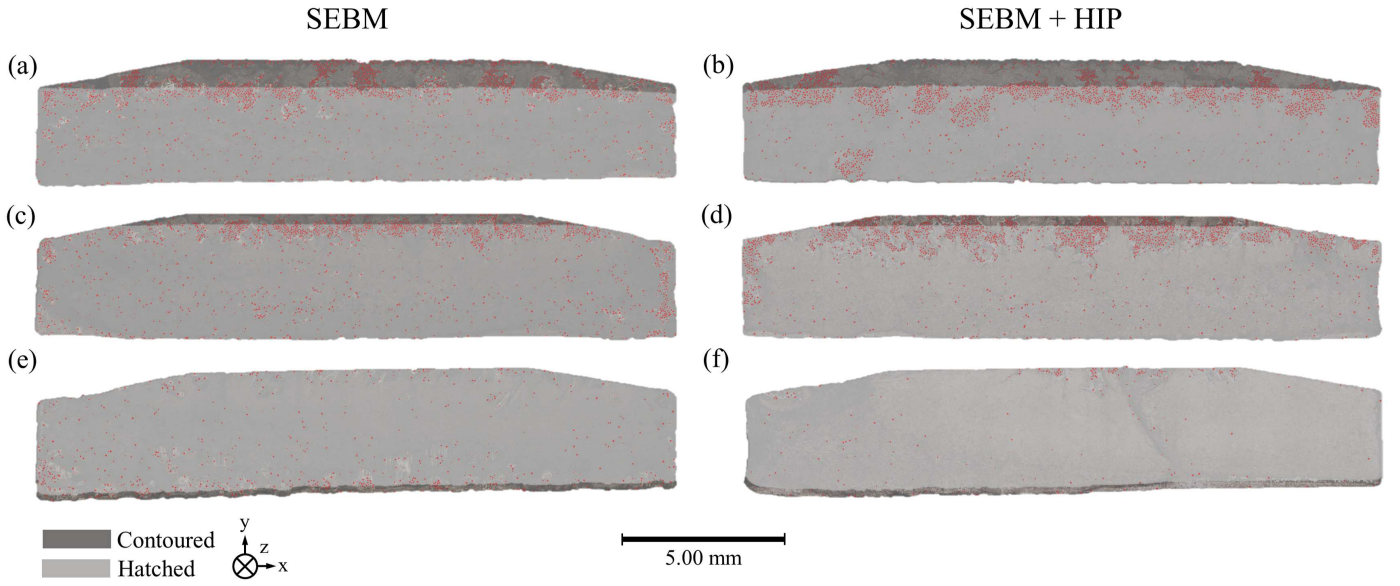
Fractographs of HIP'ed and non-HIP'ed SEBM specimens with regions unconsolidated powder particles detected on the fracture surface superimposed in red - (a-b) show specimens with the test surface in its as-built condition, (c-d) show specimens with the test surfaces machined to a depth of 0.50 mm, and (e-f) show specimens with the test surfaces machined to a depth of 1.00 mm.
